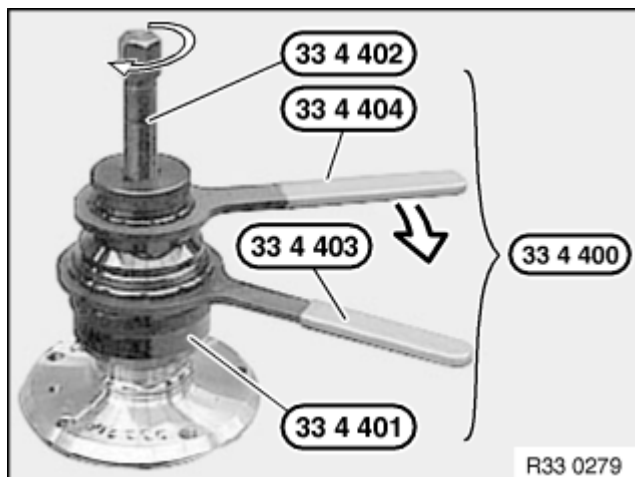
Compressing Special Tool 33 4 401 With Wrenches 33 4 403 And 33 4 404 Until Special Tool Can Still Just Be Turned In Groove
